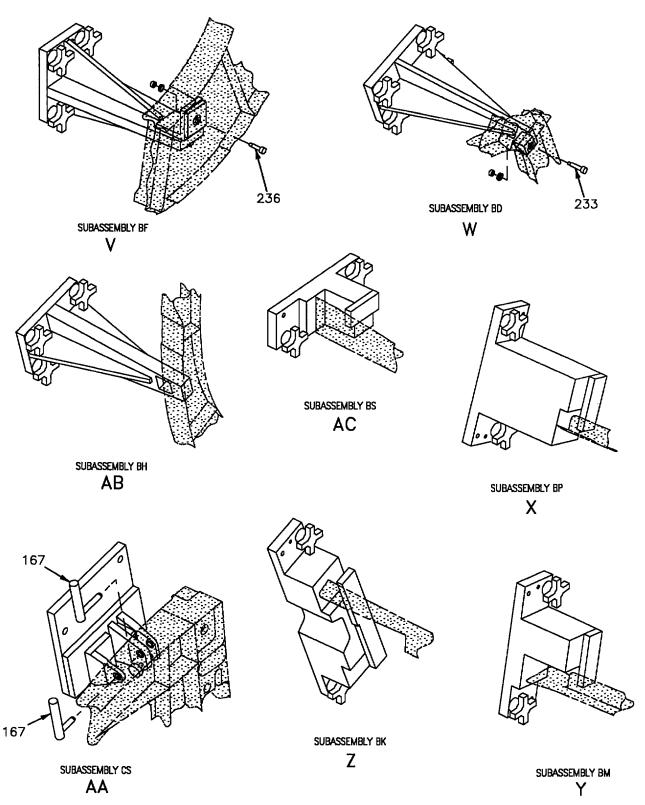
Checking, Removing, Replacing, or Repairing Damaged Inlet Structure (Sheet 9)
